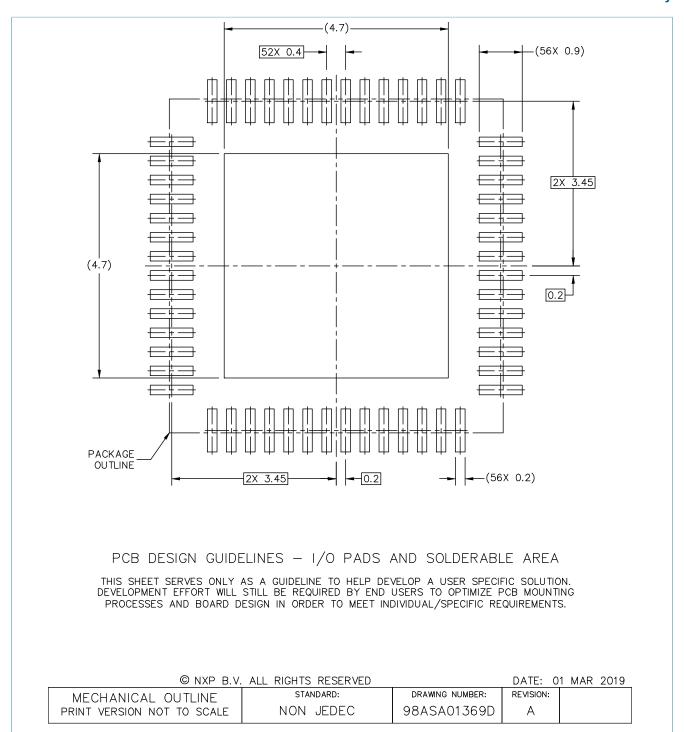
Reflow soldering footprint part2 for HVQFN56 (SOT949-6)
